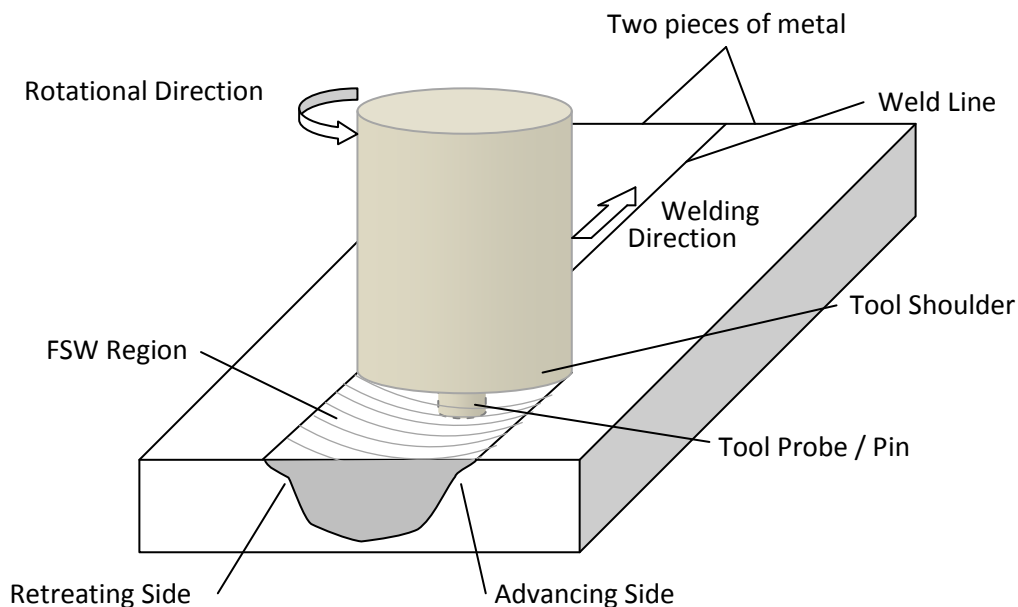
Schematic diagram of the friction-stir welding process
